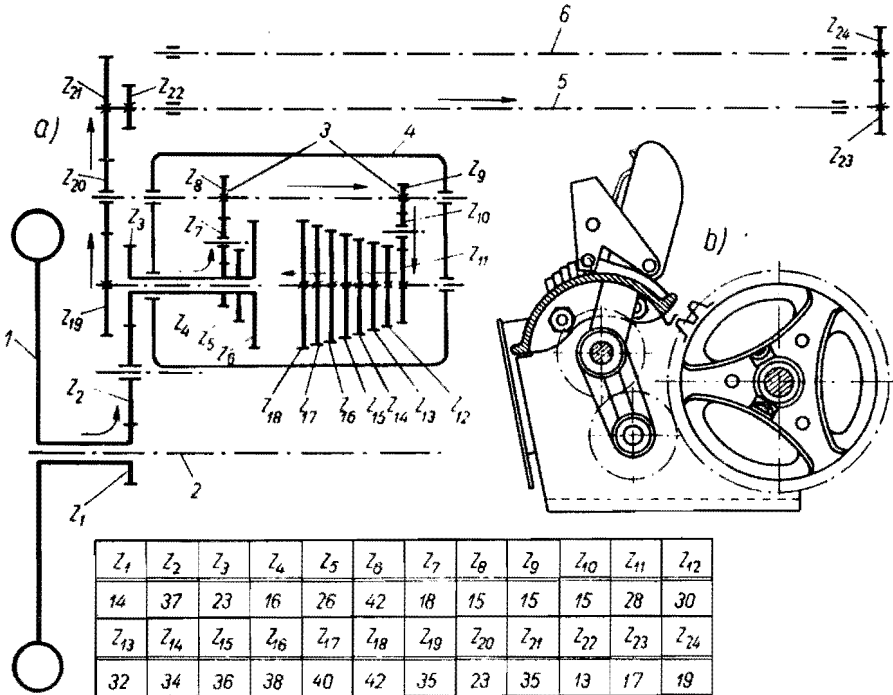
a) Example of Norton transmission gear for driving studded feeding rolls and the agitator in horse- and tractor-drawn drills: 1—ground wheel of the drill; 2—wheel axle; 3—sliding levers with toothed-wheel units; 4—transmission casing; 5—feeding roll; 6—agitator; b) detail of Norton transmission gear.
